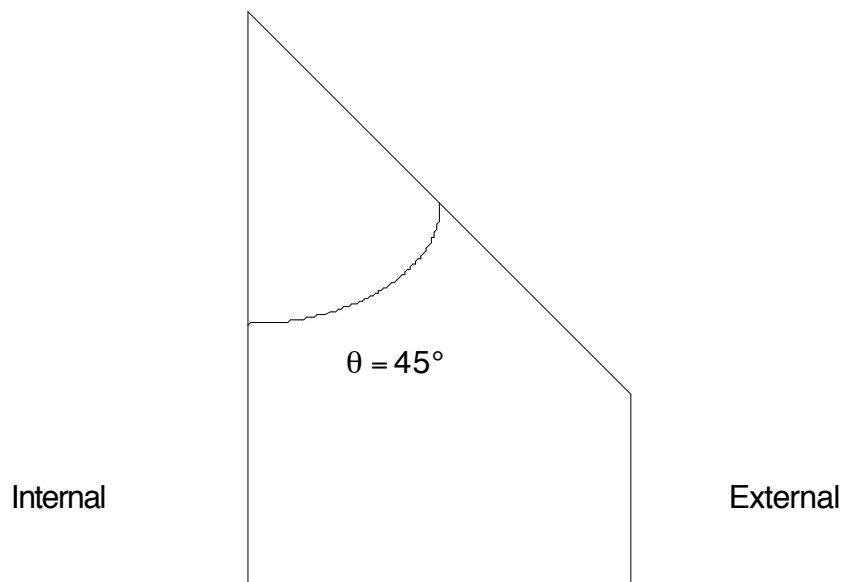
Chamfer angle on the end of the tubes, shown in cross-section.
